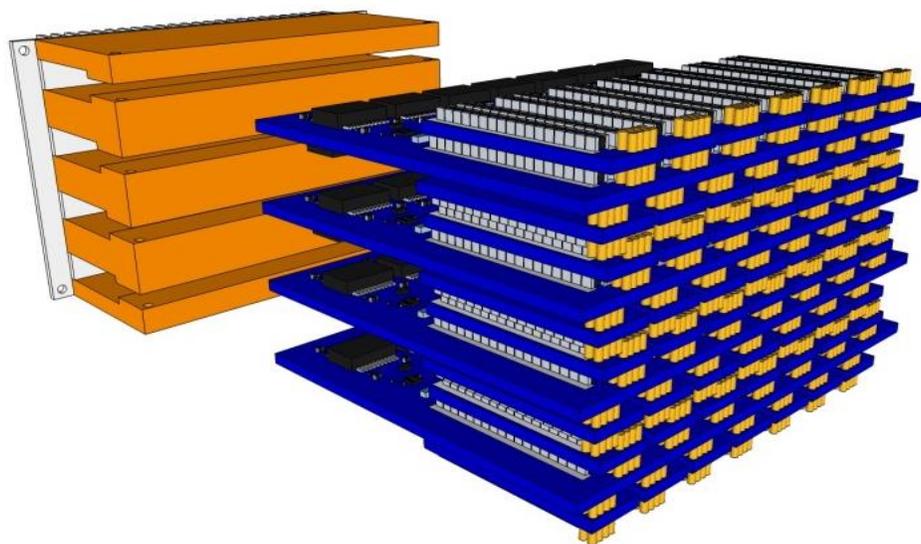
CAD Layout of full MMC Inverter with Heat Sink Design
